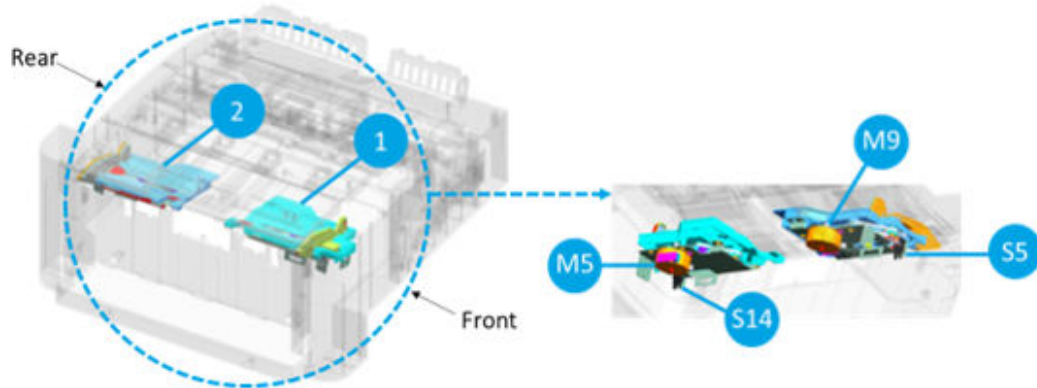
Inner finisher system - tamper unit detail view (1 of 3)
